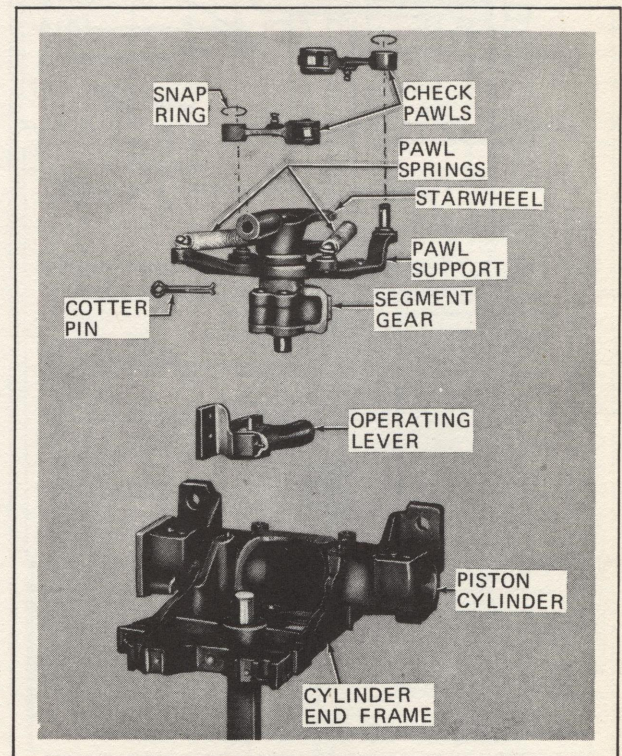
EXPLODED VIEW OF DRIVE MECHANISM PARTS.
